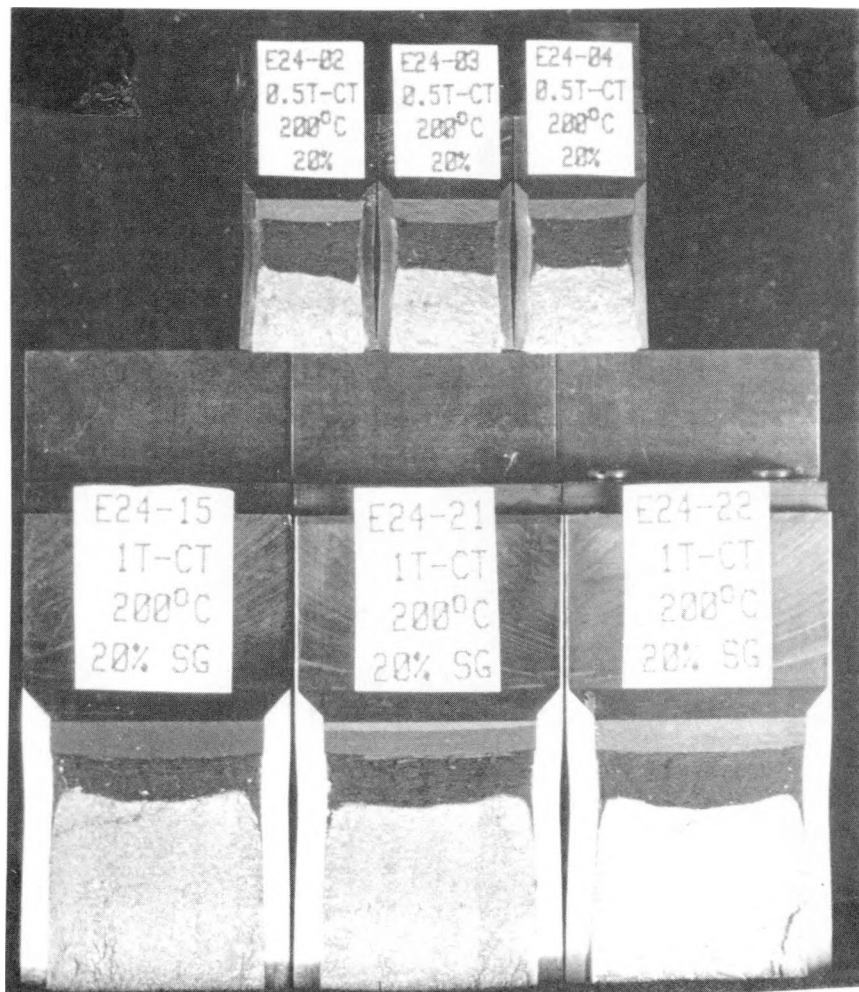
Photographs of the fracture surfaces from the size effect study using the E24 weld. The 1T-CT surfaces indicate some reverse tunneling at the tips of the side grooves.
